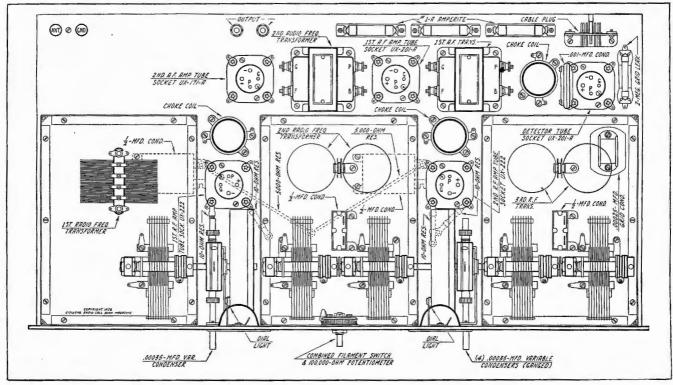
All parts for the Master model should be laid out in accordance with the baseboard drawing reproduced herewith
